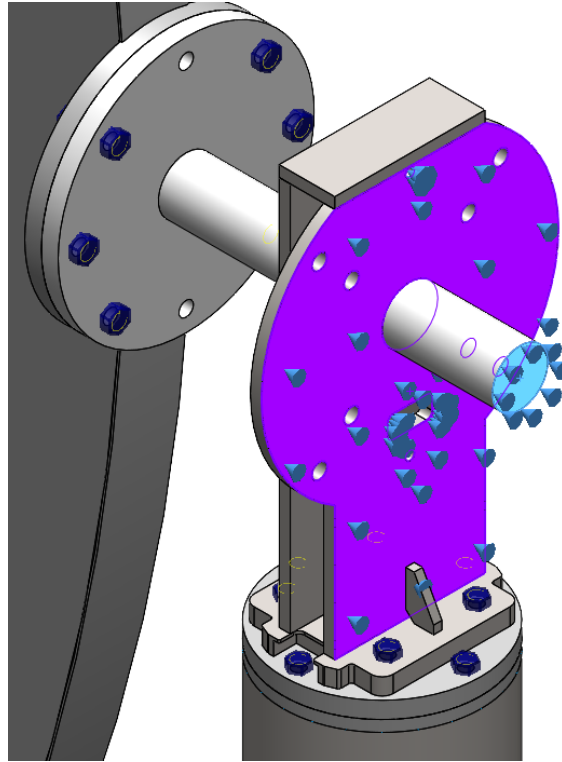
The rigid connection between the ring shaft and the shaft carrier
